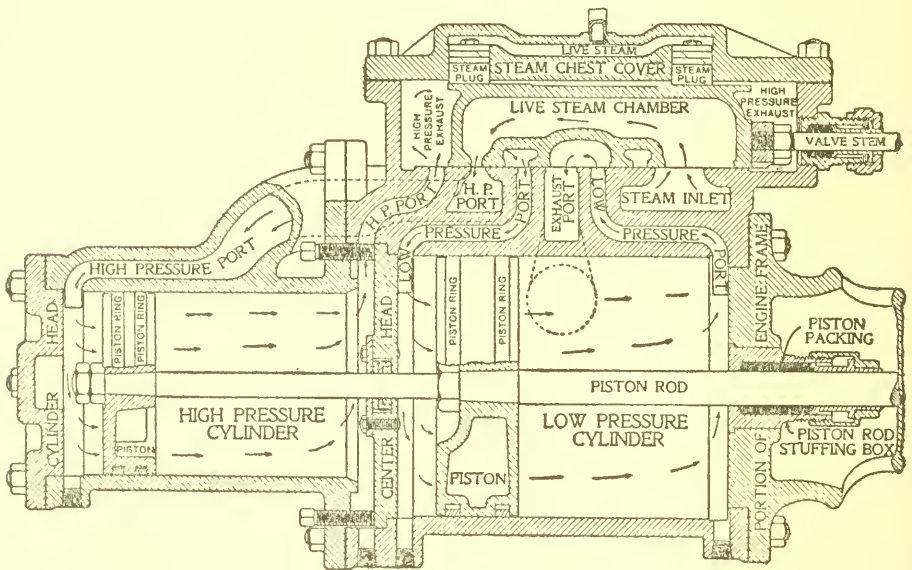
SECTIONAL VIEW OF "WOOLF" COMPOUNDED CYLINDER.
